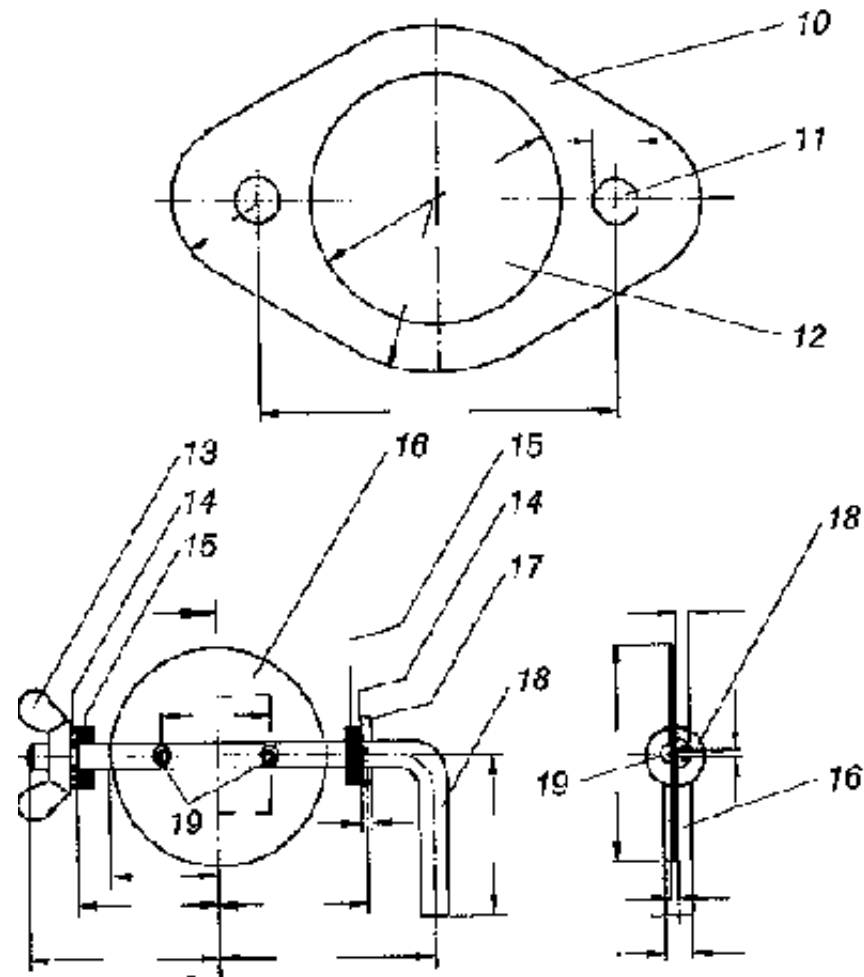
Venturi mixer parts, continued. 10 Connection flange, 11 Bore for connection bolts to engine and air filter, 12 Bore for connection of mixer body (brazed, welded), 13 Wing nut for fixing the butterfly valve shaft, 14 Washer, 15 Rubber/plastic seal ring, 16 Butterfly valve, 17 Washer fixed to butterfly valve shaft, 18 Butterfly valve shaft cum control lever, 19 Small bolts for fixing butterfly to shaft.
